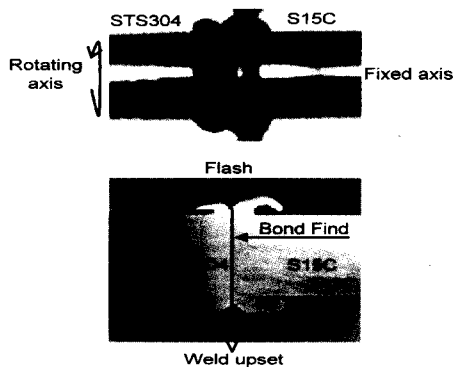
Friction welded specimen by dissimilar materials
